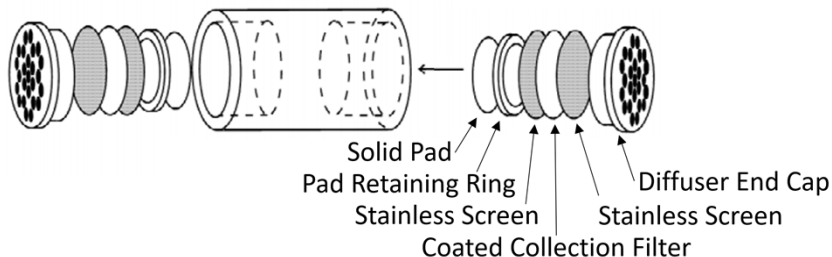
NO<sub>2</sub> filter and housing exploded view – modified from OgawaUSA.com image
